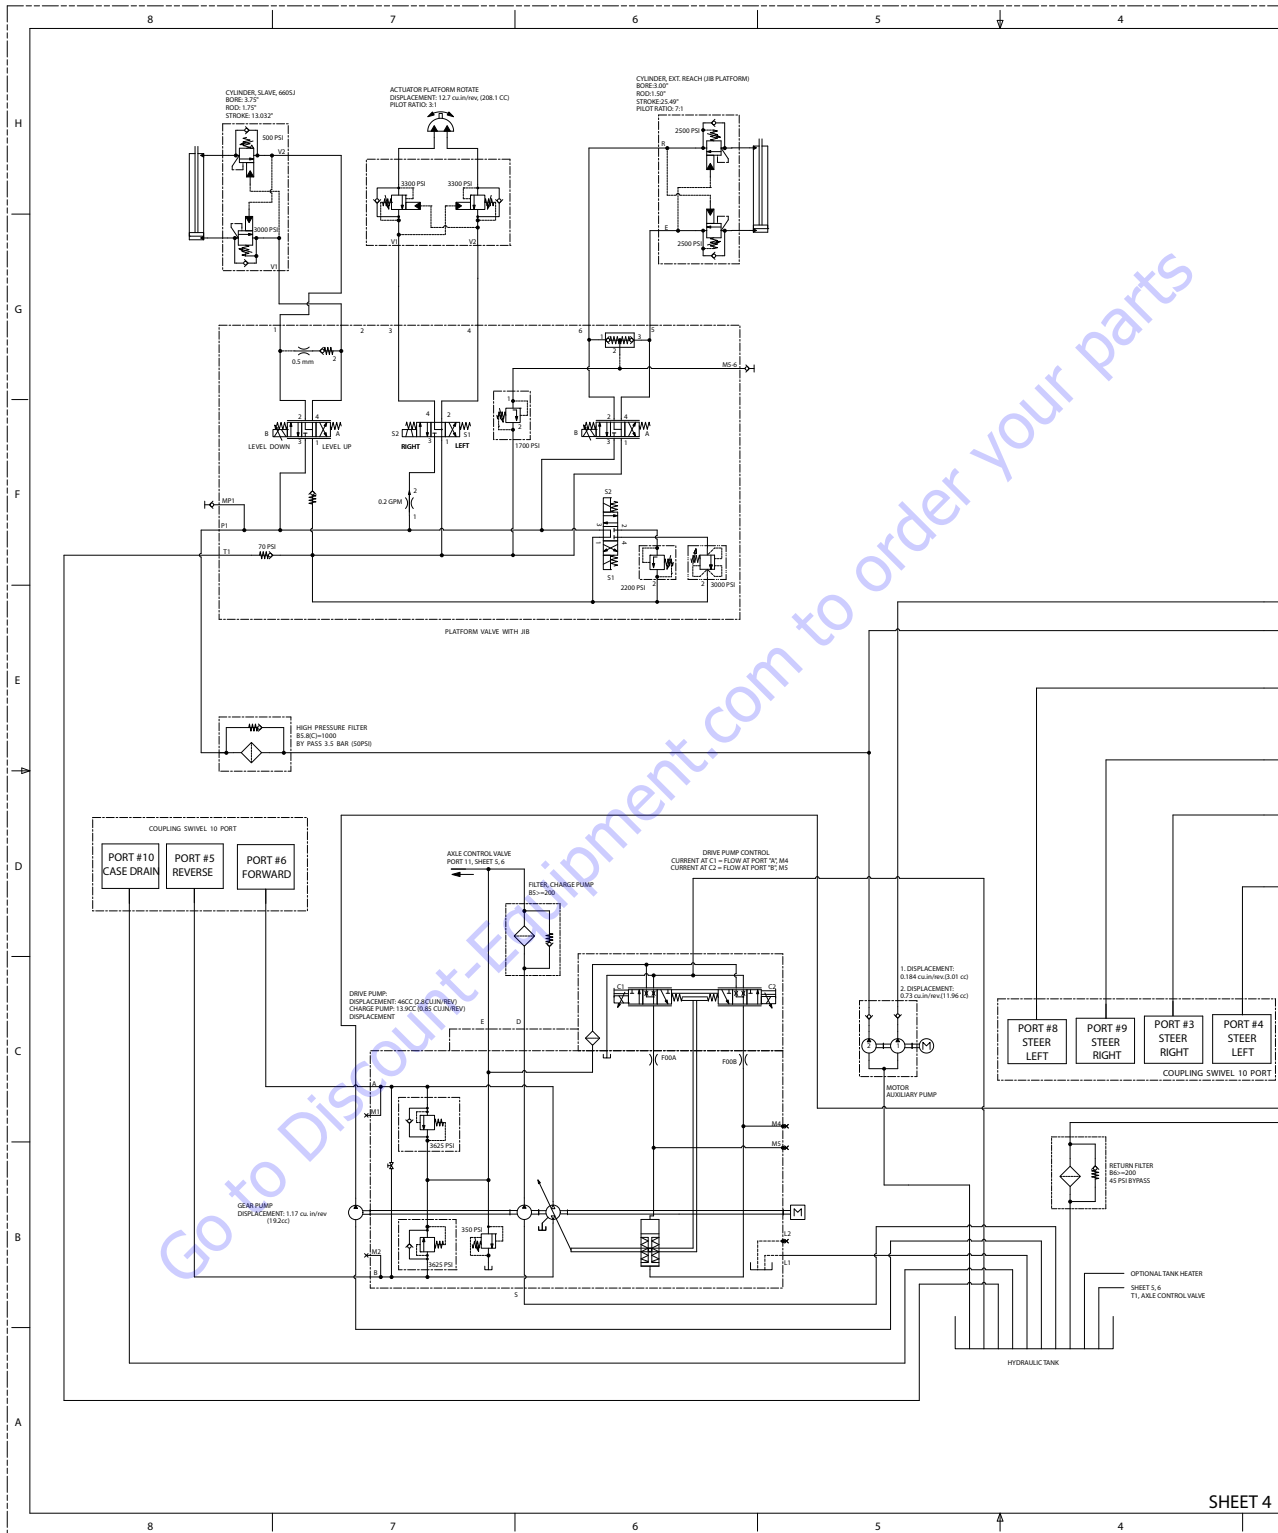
4-Wheel Steer (4WS) with Jib Hydraulic Schematic - Sheet 1 of 2
